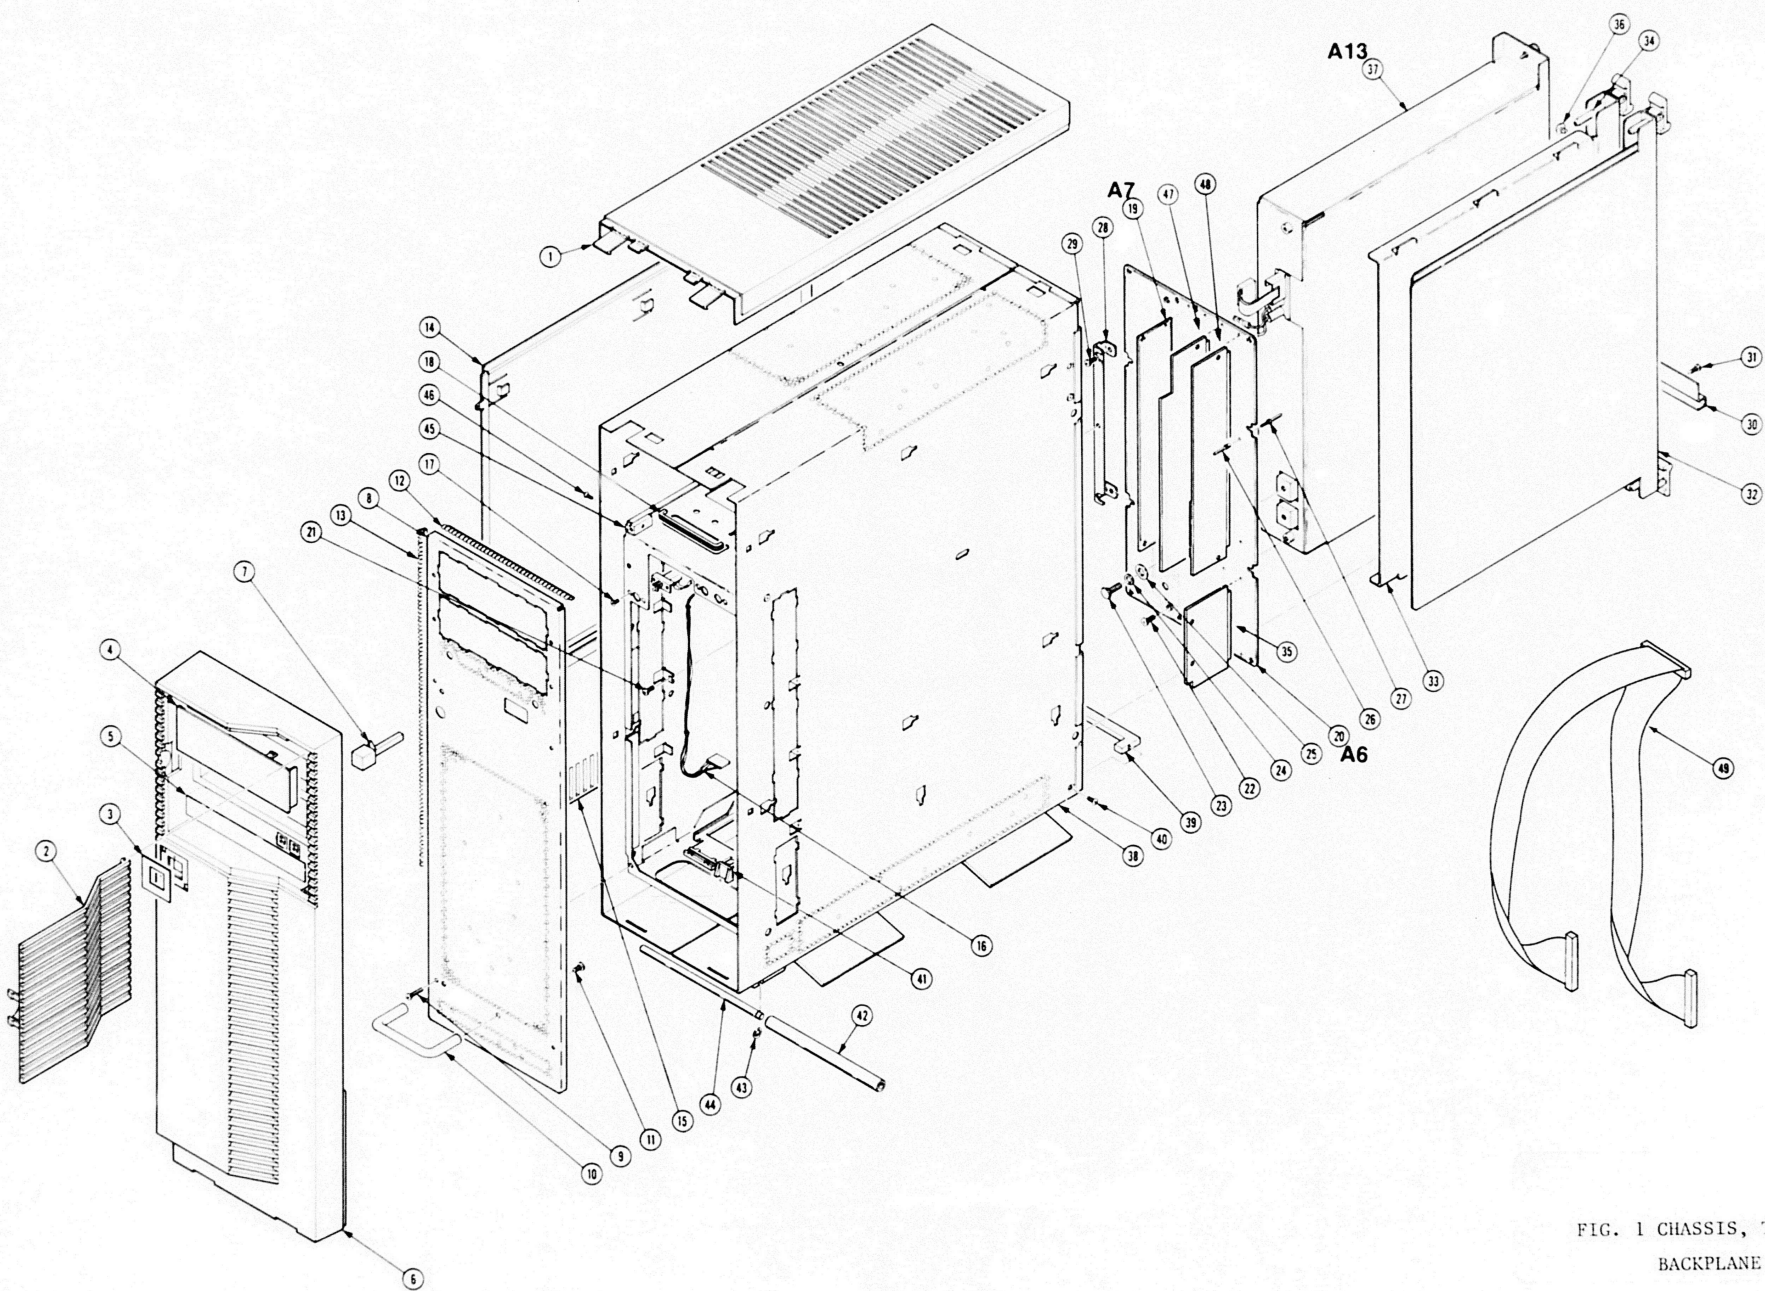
CHASSIS, TERMINATOR, AND BACKPLANE BOARDS
